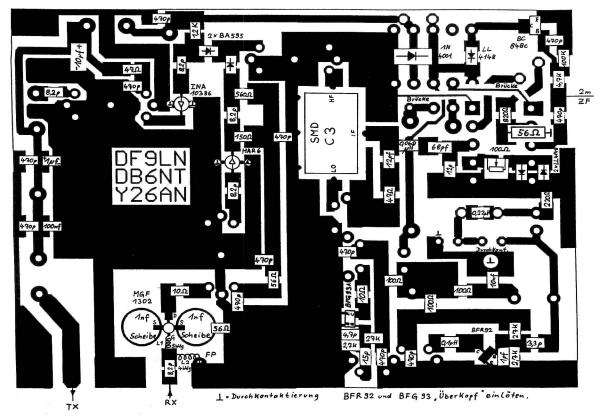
PCB track-side layout (DUBUS Technik IV)
